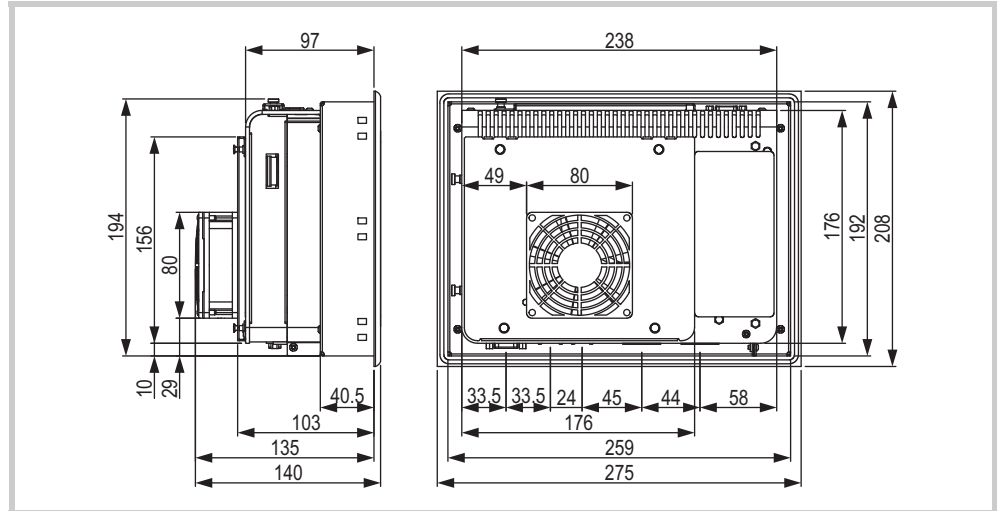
Mechanical dimensions of the 8.4" devices in mm
